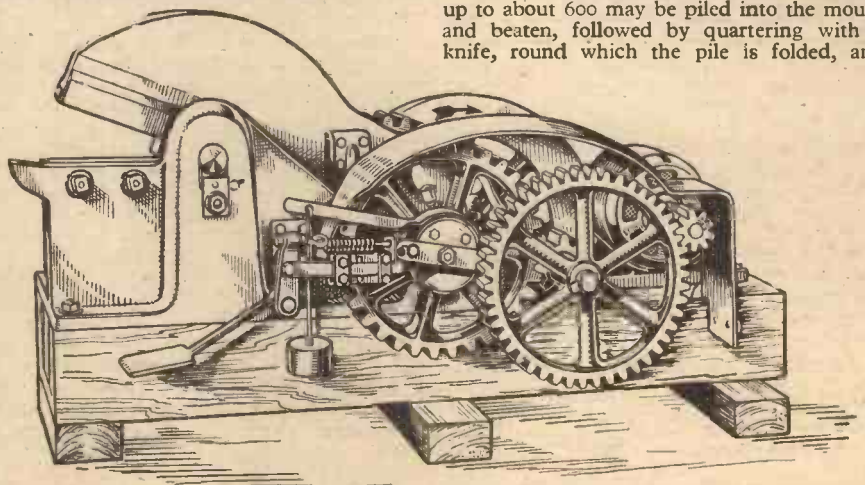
One type of shear tried out for cutting and trimming the leaves, instead of using the hand-trimmer.
